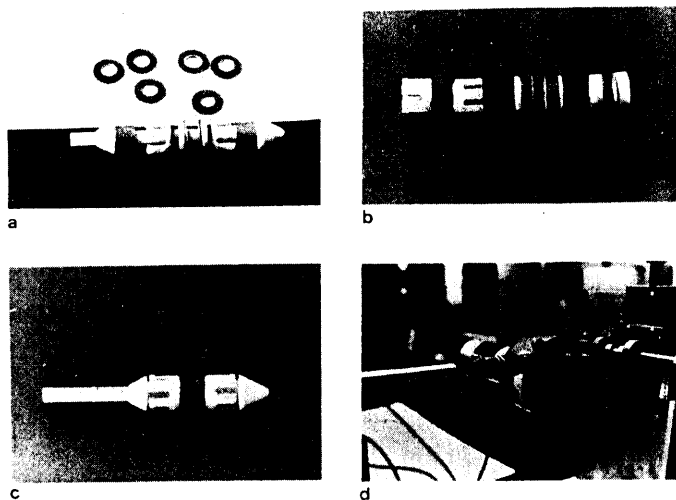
Photograph of (a) probe body and spacers, (b) coils, (c) assembled probe, and (d) tube, probe, and the drive unit.
